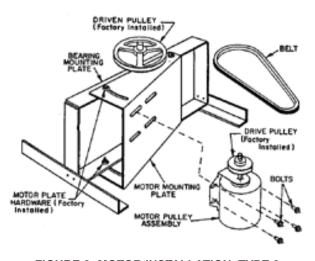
MOTOR INSTALLATION, TYPE 2
